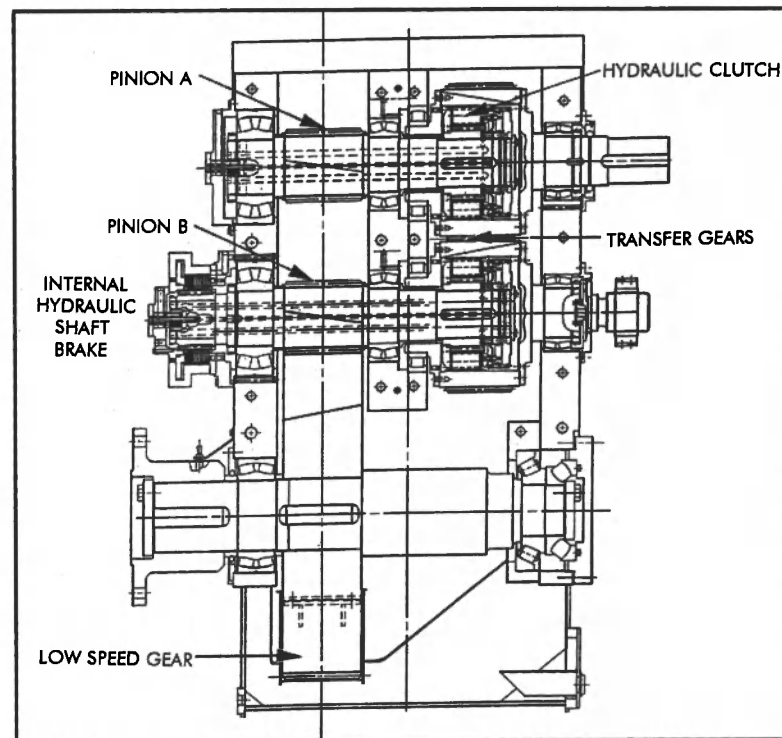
Reduction drive shown "unfolded." Pinions A and B both engage low-speed (propeller-shaft) gear at all times, but only one transmits torque at any time.
